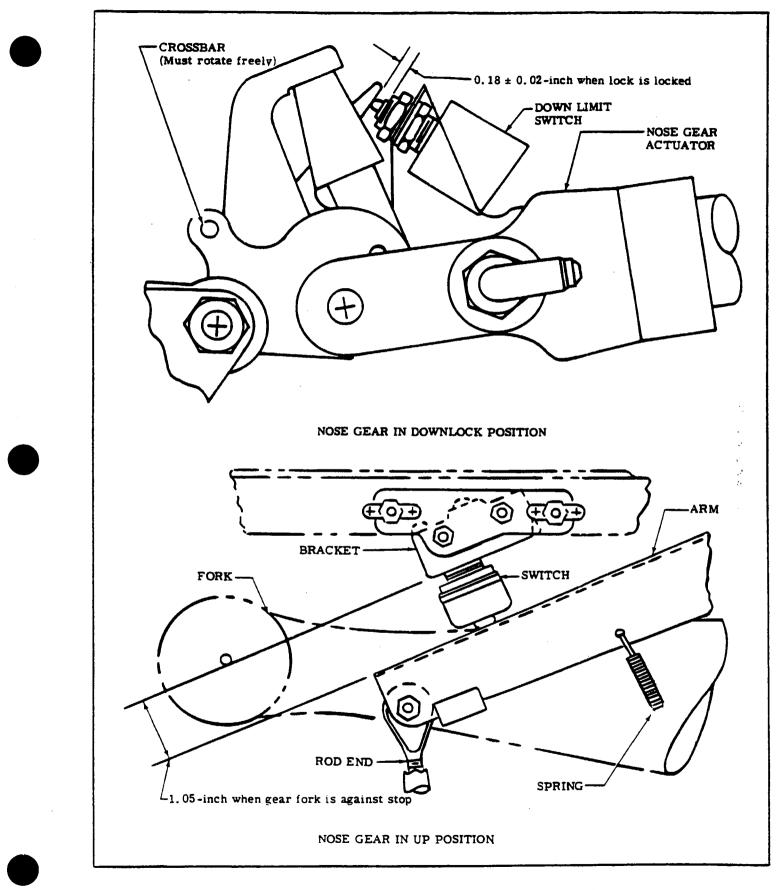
Rigging Nose Landing Gear (Sheet 2 of 2)
